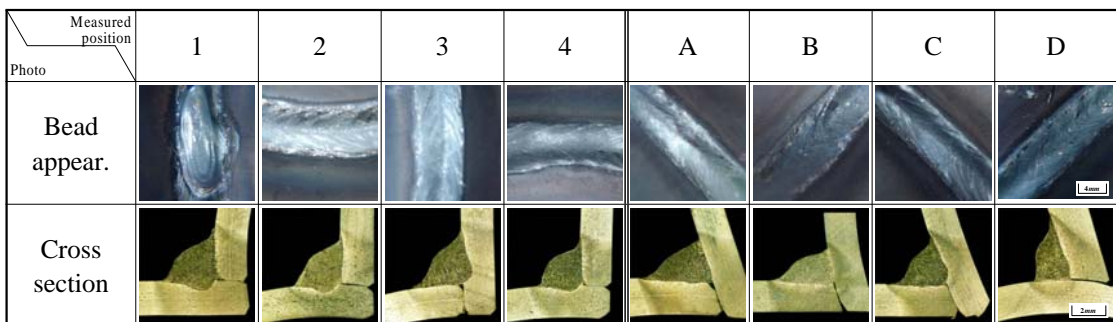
Bead appearance and cross section of weldment in CMT welding
